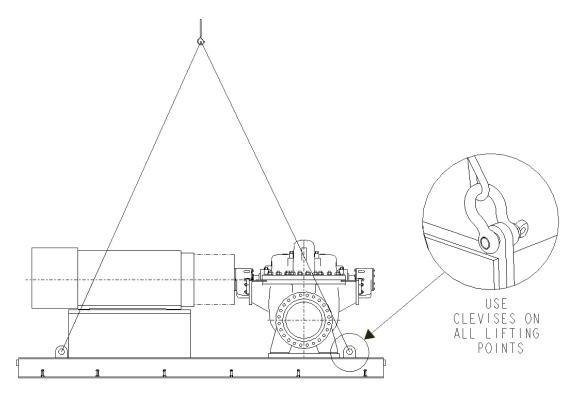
Example of the proper lifting method for baseplate-mounted units with a driver indicating the use of clevices
